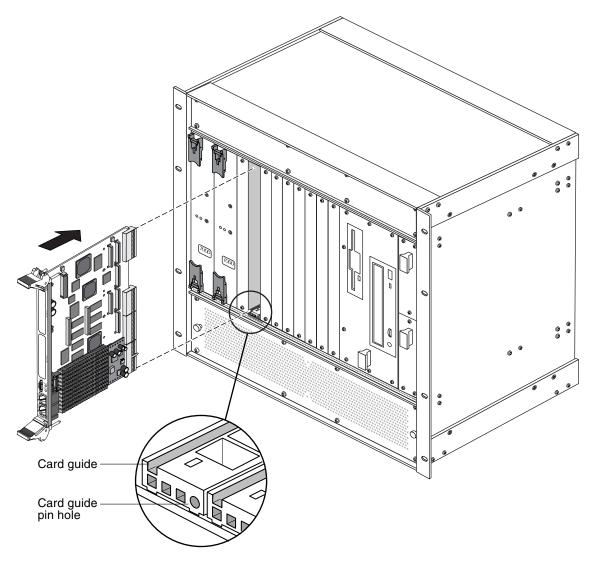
Installing a Typical Netra CP2160 Board Into a CompactPCI Chassis in a System Host Slot
